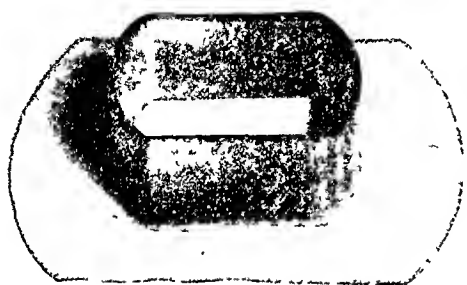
The rubber collar is extremely heavy, but pliable. The flange is very thin and easily moulded to the part.
